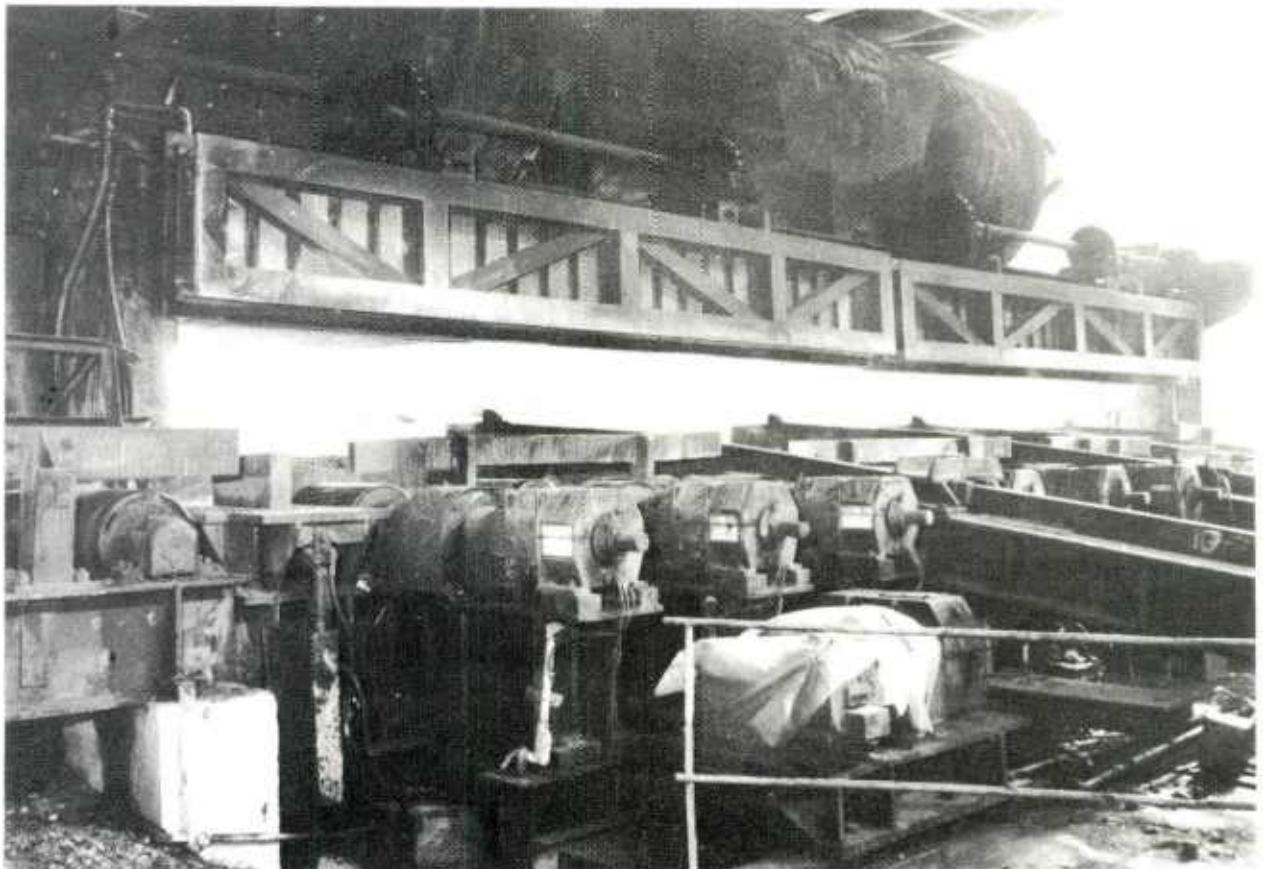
Reheat Furnace Between the 30 inch Billet Mill
